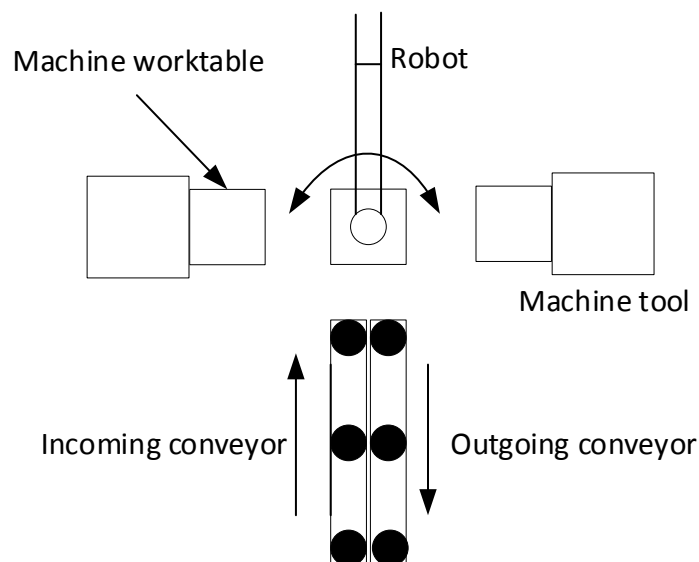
Automated manufacturing cell with two machine tools and robot.
